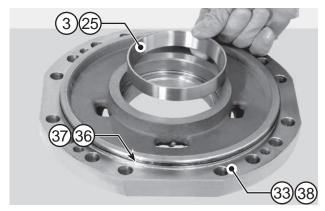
If the bearings need replacing, extract the external thrust blocks of the bearings (3) and (25) from middle cover (33, 38).
